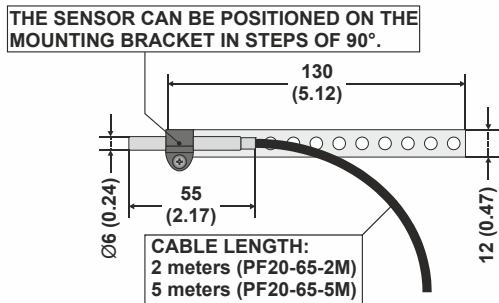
Dimensions of the PF20 duct sensor in mm (inches)
